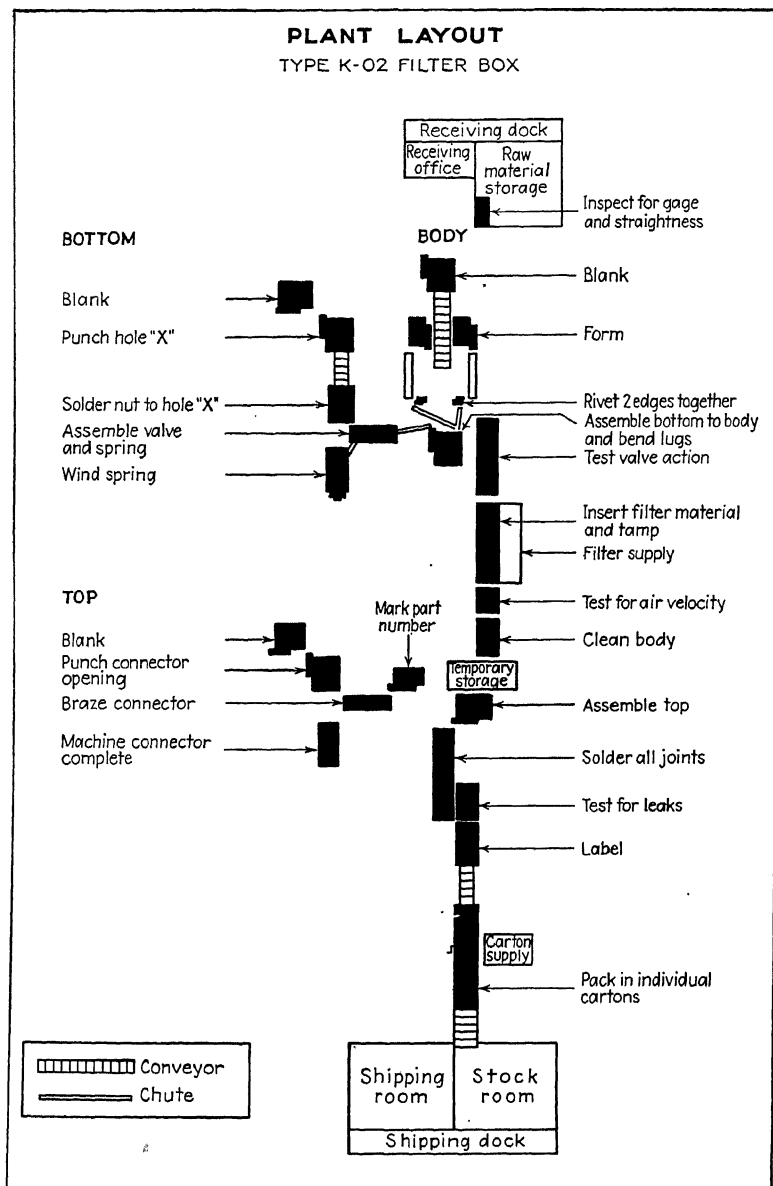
Plant layout for manufacture of type K-02 filter box.
